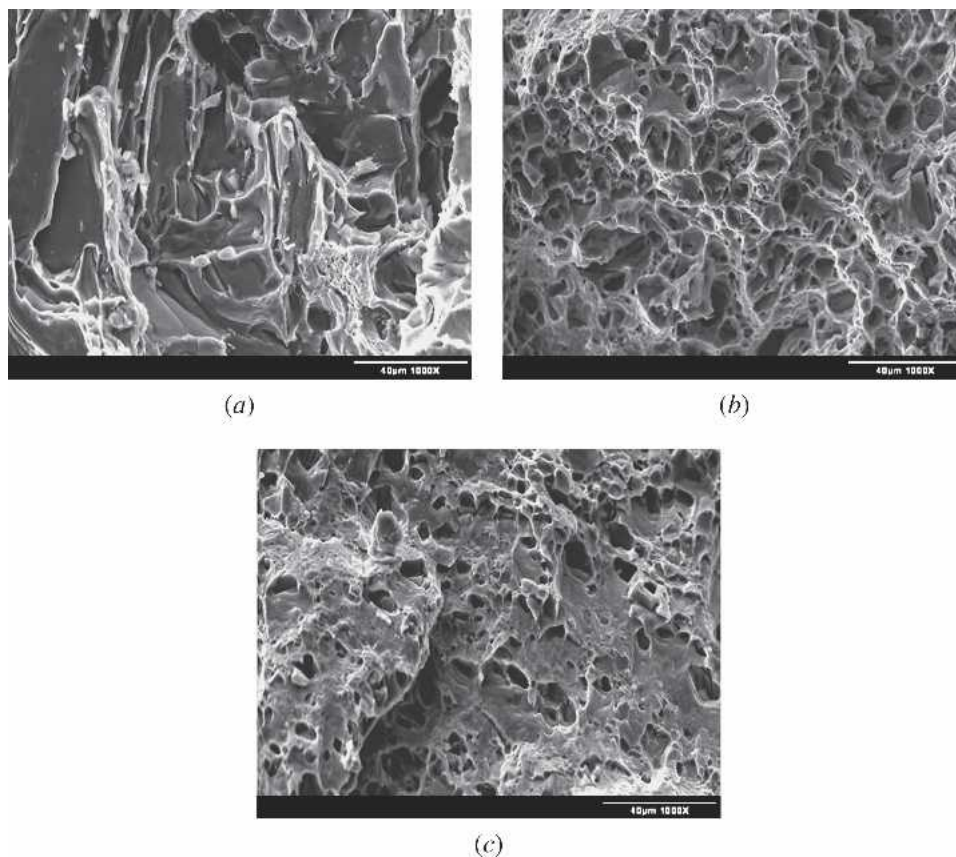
SEM micrographs showing fracture surfaces of A356 tensile specimens: (a) as-cast; (b) as-FSP, 700 rpm–203 mm/min; and (c) FSP + T6, 700 rpm–203 mm/min (triflute pin).
